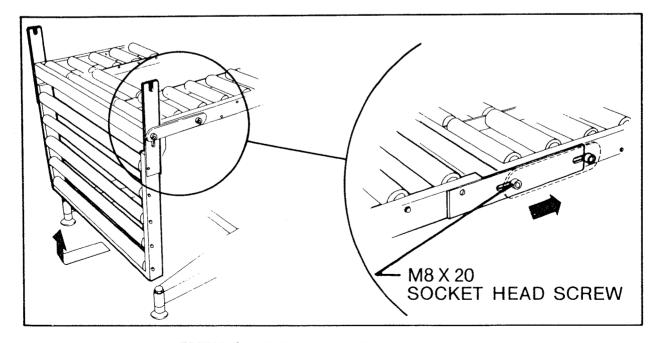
INFEED CONVEYOR ASSEMBLY
